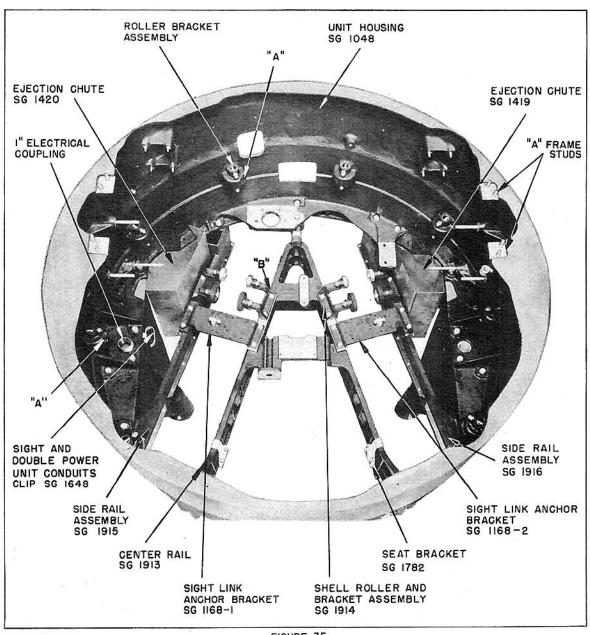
UPPER TURRET - PARTIAL ASSEMBLY
